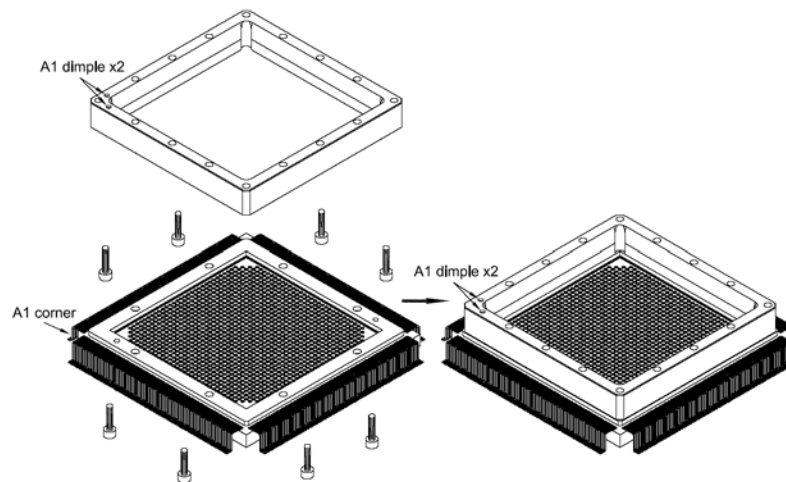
• Assemble Socket Housing to CQ352 to LG1272 Adapter
